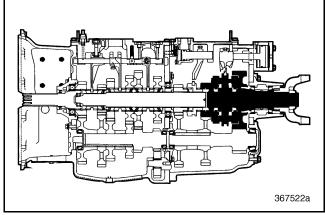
Rear Mainshaft (Output Shaft) and Synchronizer Component Locator (T313L21/T318L21 Shown)
